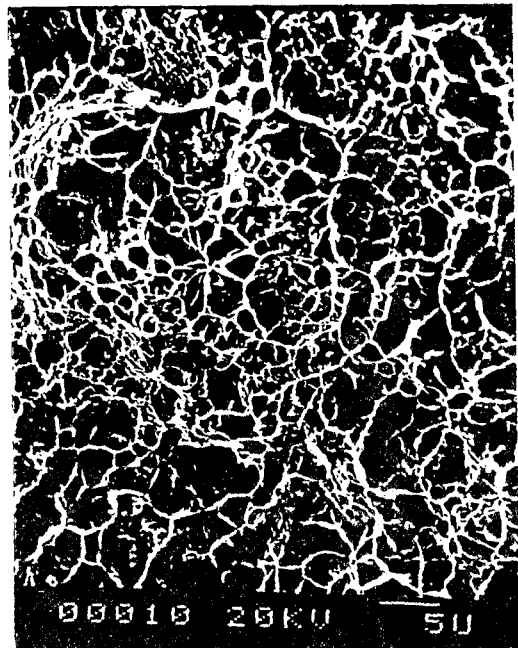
Fracture surfaces of weldment tensile specimens at -70°C
